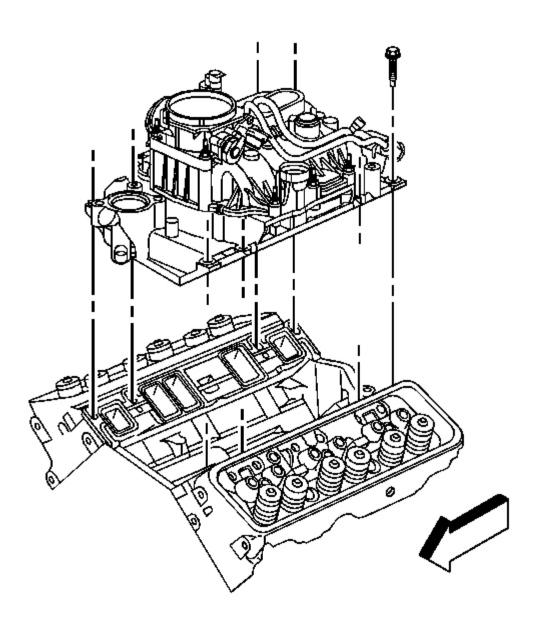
Intake Manifold Courtesy of GENERAL MOTORS CORP.
